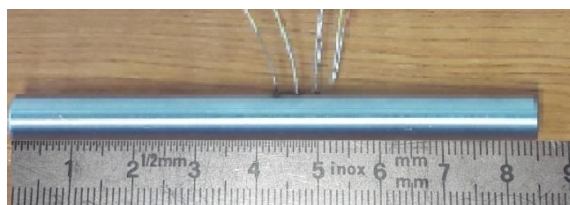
A specimen for performing a SICO test, with thermocouples welded to appropriate position
